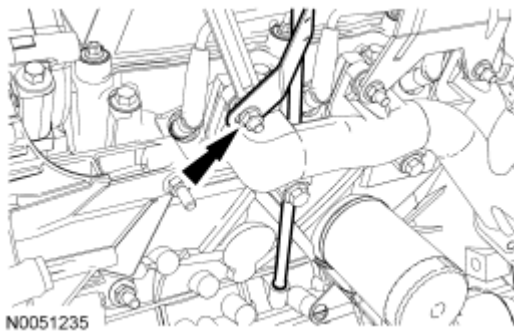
Locating Nut & Upper Intake Manifold Brace
